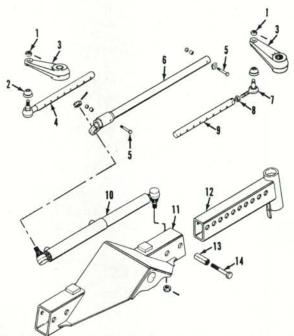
Exploded view of steering tie rod, cylinder, arms and related parts used on two-wheel drive tractors.
